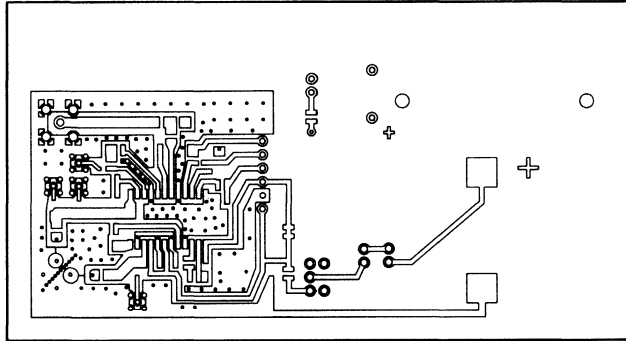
TRF1400 Test Circuit Board Layout — Top Side
